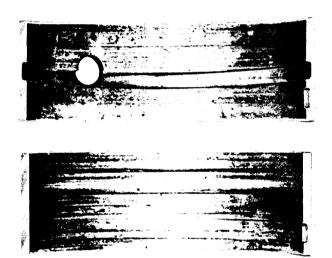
Scored Bearing Due to Dirt or Lack of Oil
